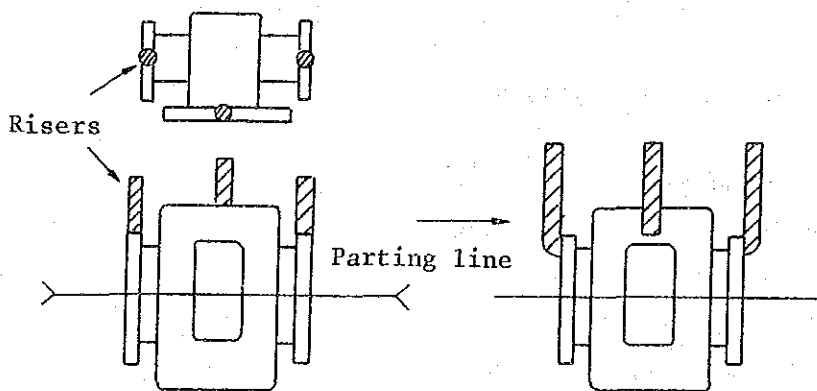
Modifying the casting plan to facilitate automatic grinding—valve body
